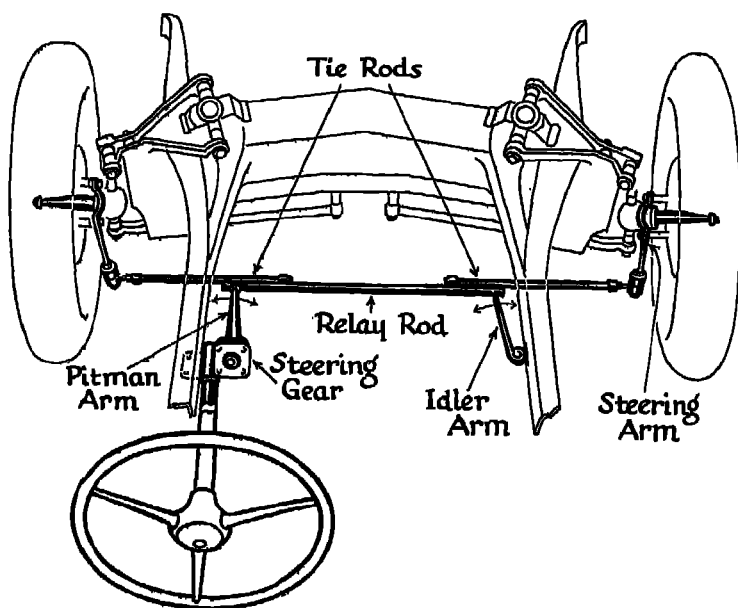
How the steering mechanism operates on many modern cars. Heavy shaded parts show how motion is transmitted through the steering gear to the front wheels.
